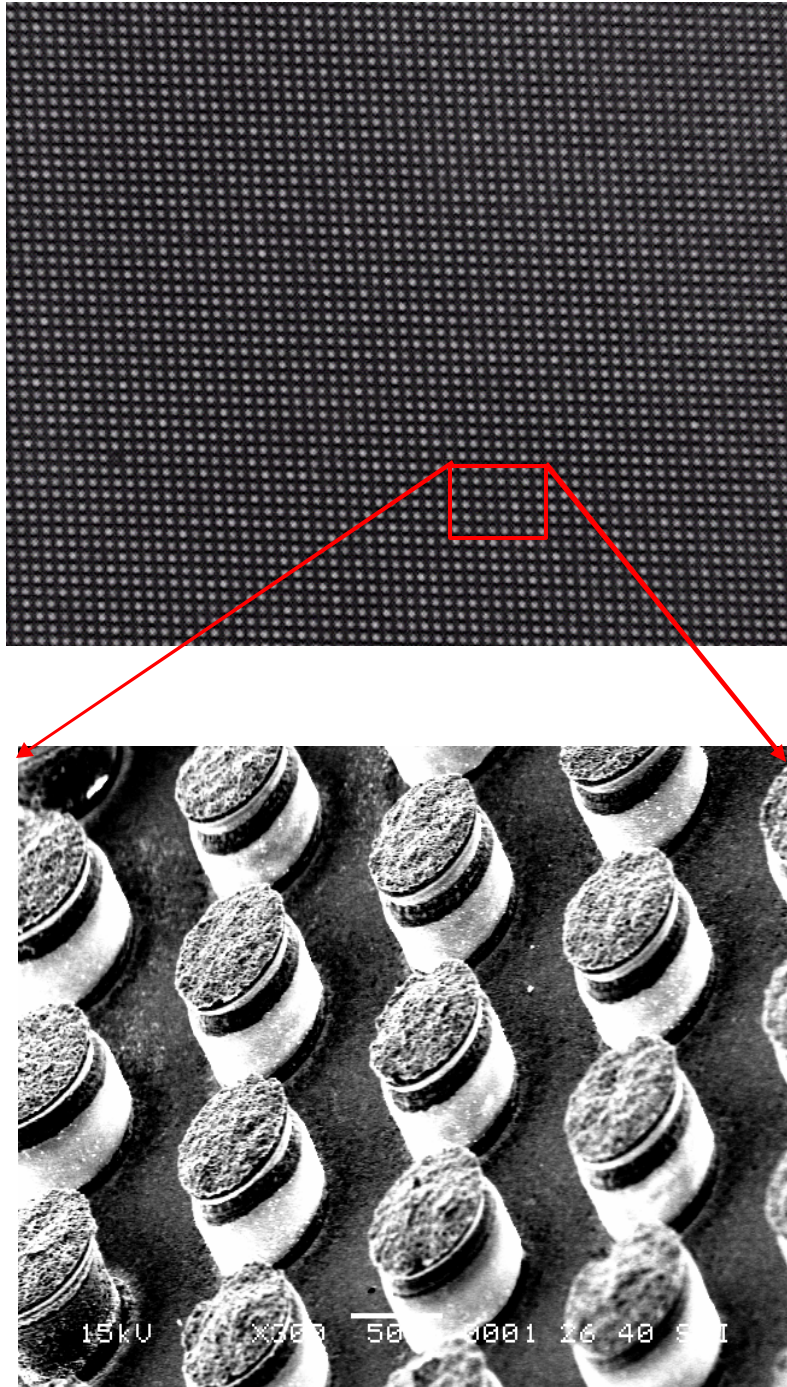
Cross-sectional view of BoN interconnects after one time solder reflow
